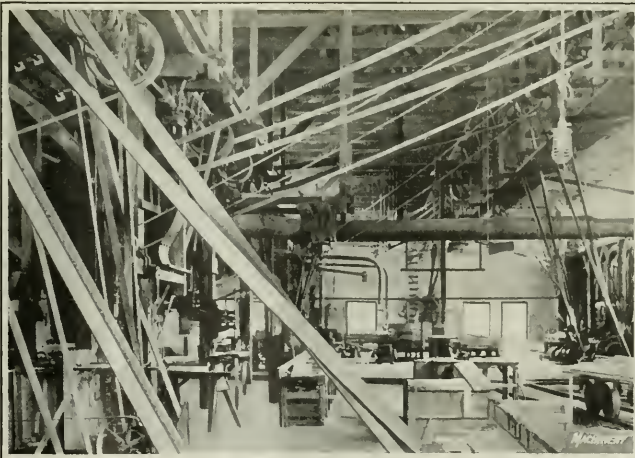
View of Woodworking Shop before Installation of Motor Drives
